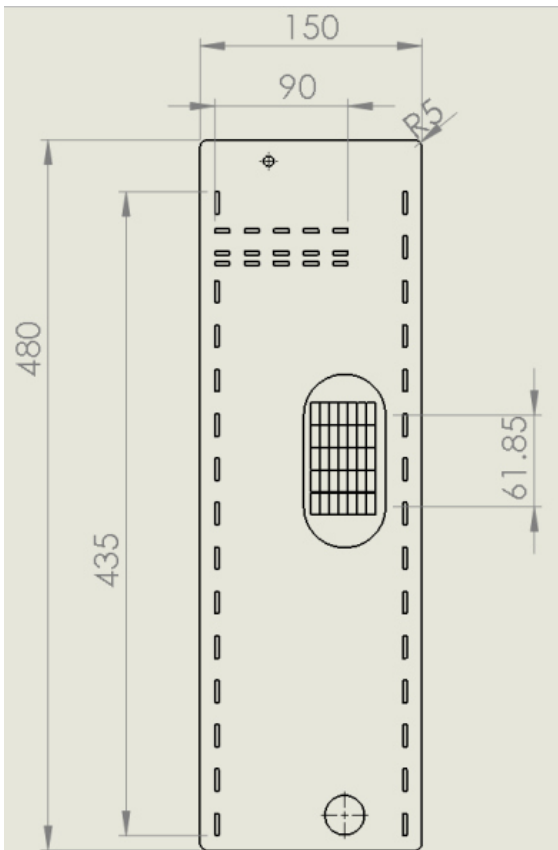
'Testbench platform Under piece'. Testbench mounting for toolhead and digital calliper.
